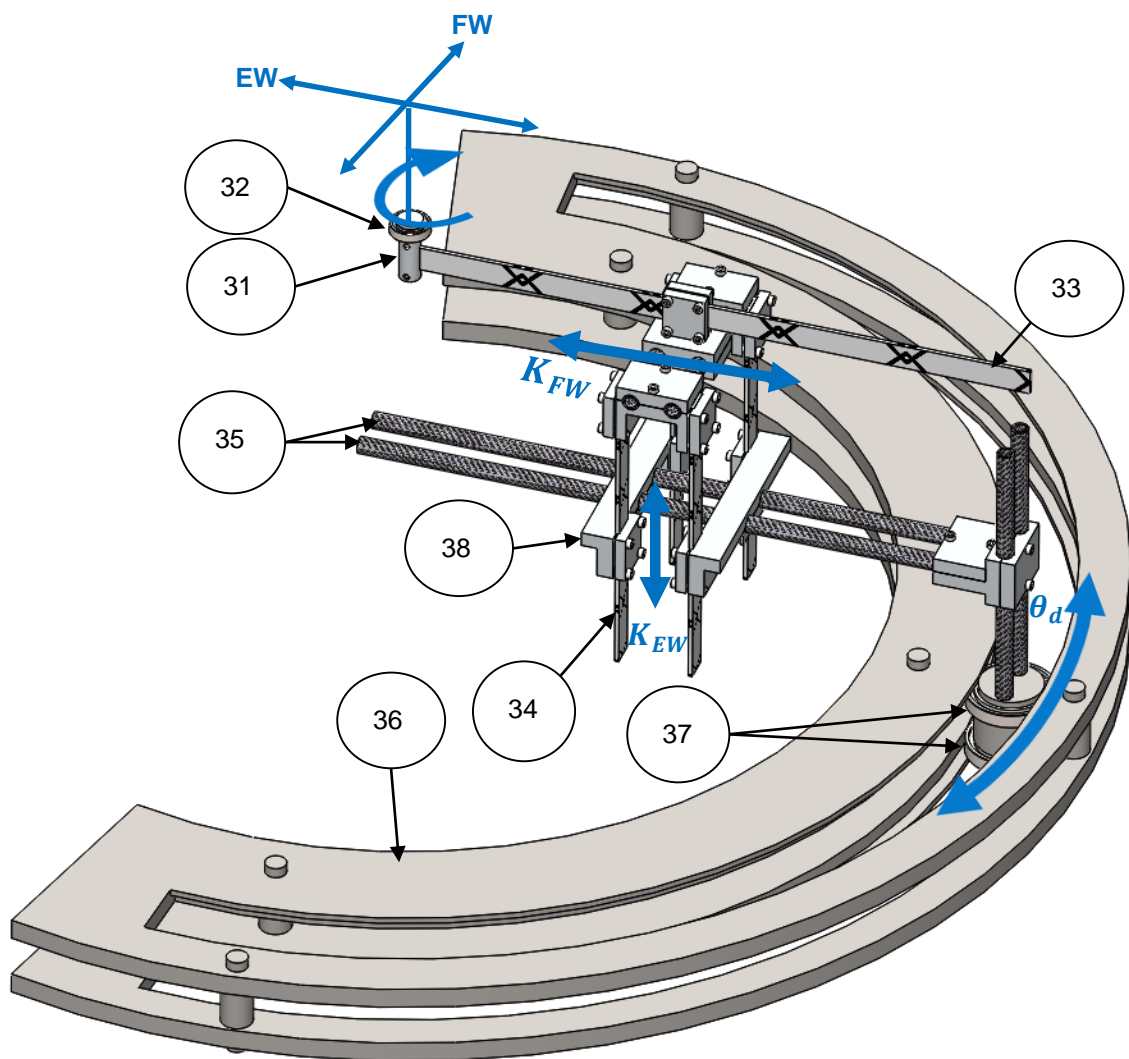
Plunging and lead-lag Spring subassembly: 31. Flapwise (FW) spring (33) fixture, 32. SKF bearing, 33. Flapwise spring, 34. Edgewise spring, 35. Rigid carbon rods, 36. Steel plates, 37. SKF bearings, 38. Edgewise (EW) spring fixture.
